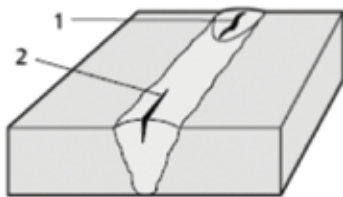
Hot cracks. 1: crater crack and 2: longitudinal crack. Narrow and deep bead increases the risk of hot cracking.
